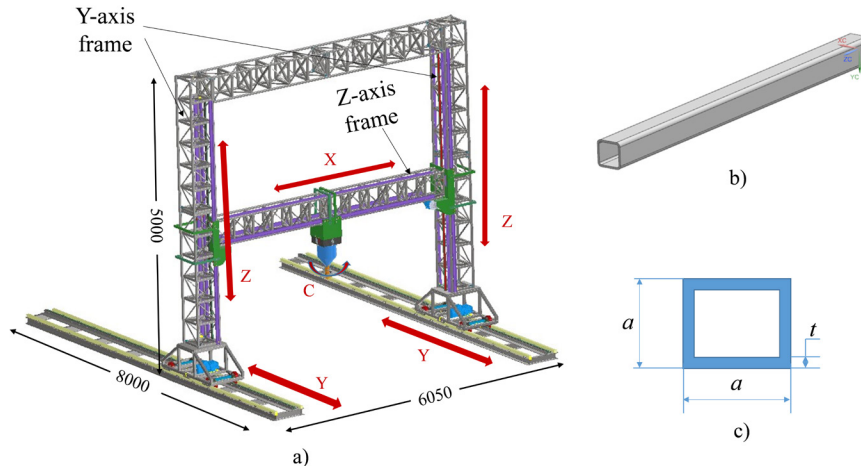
An experience-based design of a large-scale 3D concrete printer; a) 3D model of the printer; b) 3D model of the steel box beam; and c) cross-sectional view of the box beam
